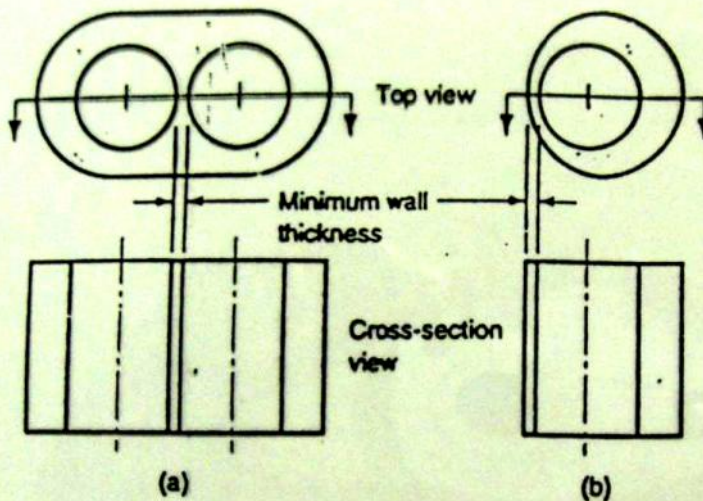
Minimum recommended wall thickness (a) between holes or (b) between a hole and an outside wall should be 0.060 in. (1.5 mm).
